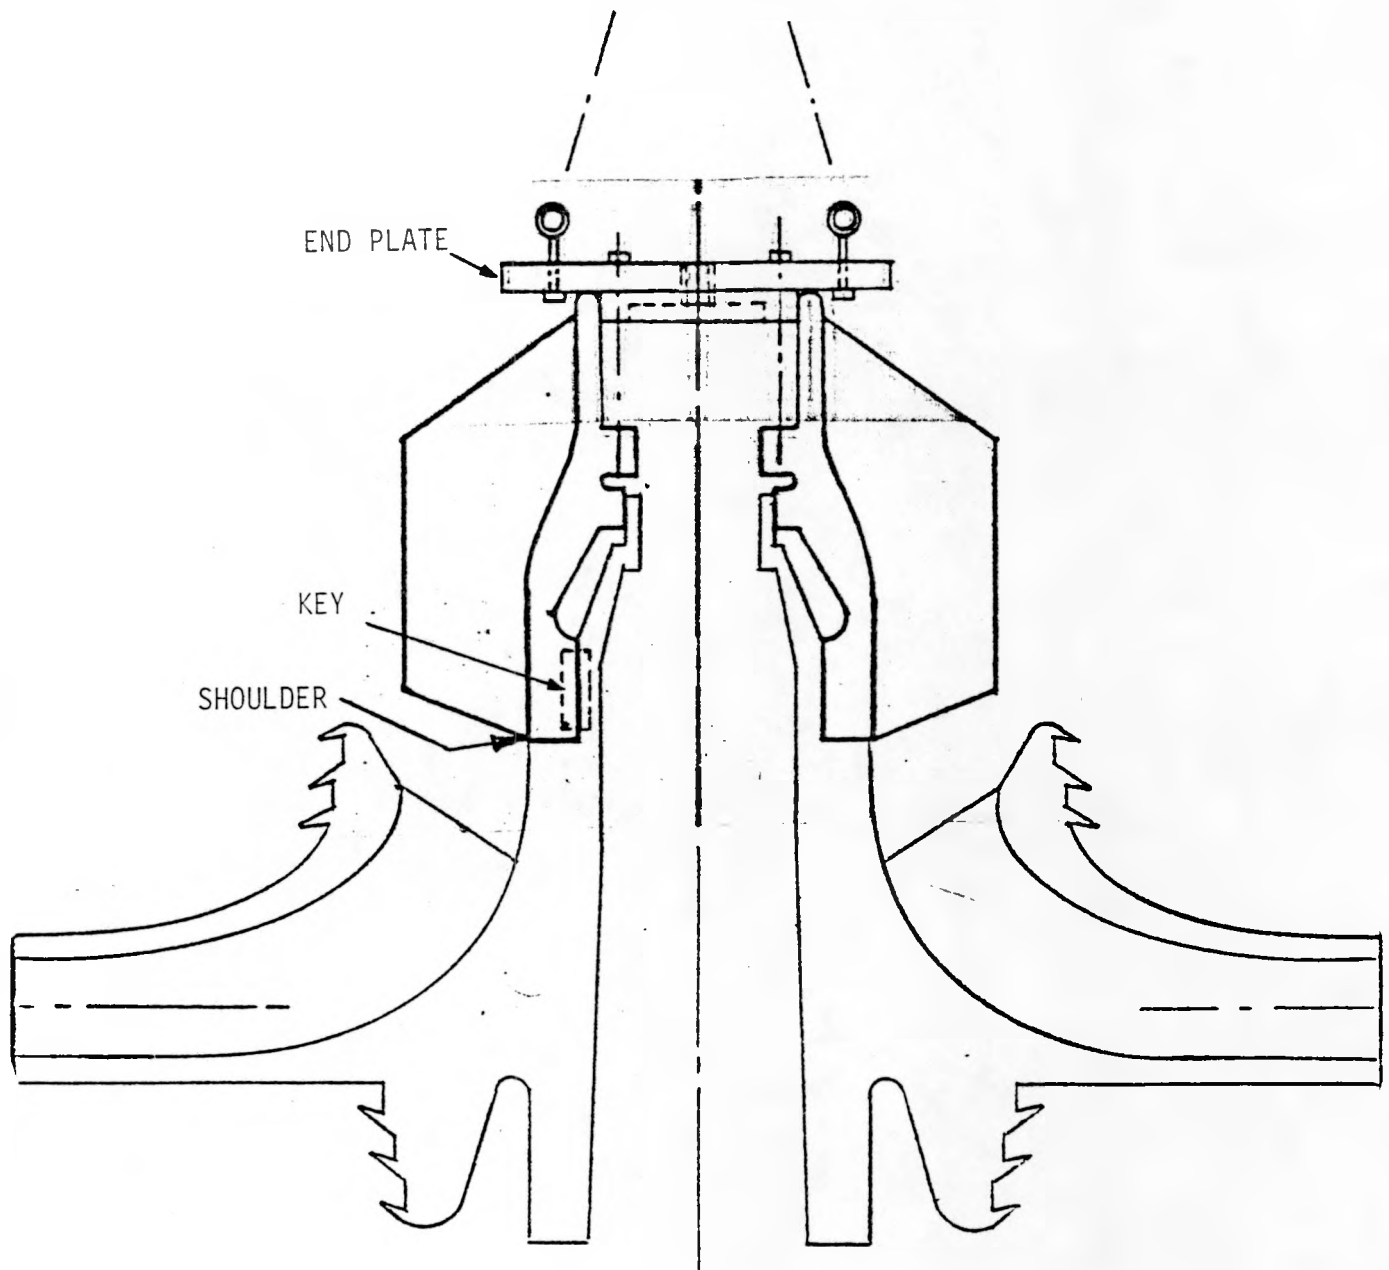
Inducer/Impeller Assembly with Inducer Key and End Plate Attached
